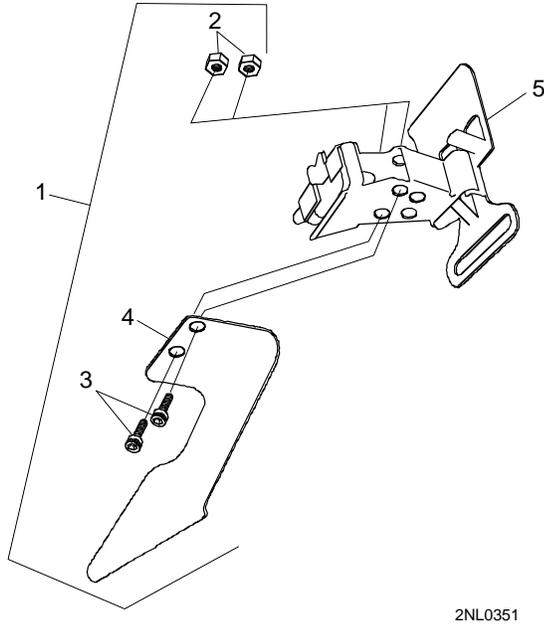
Parts Kit, Adapter Assembly, P/N 7792991
